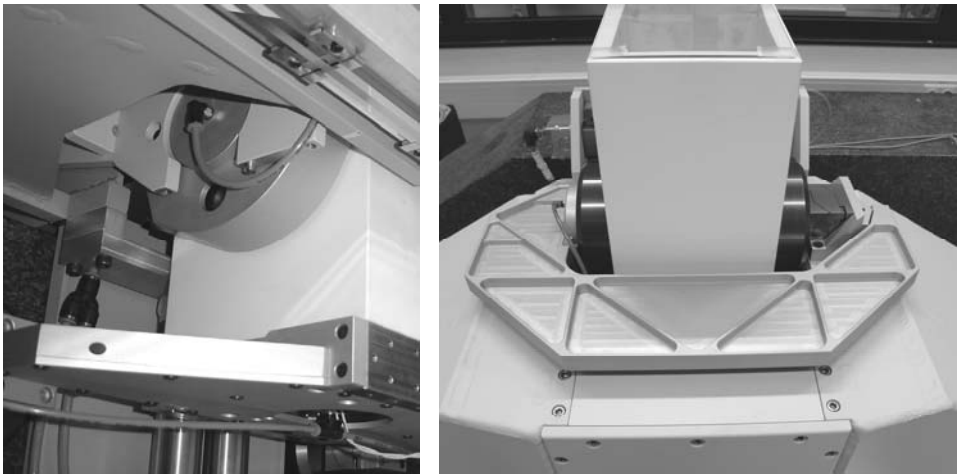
Z stage lower (left) and upper (right) tube bearings
